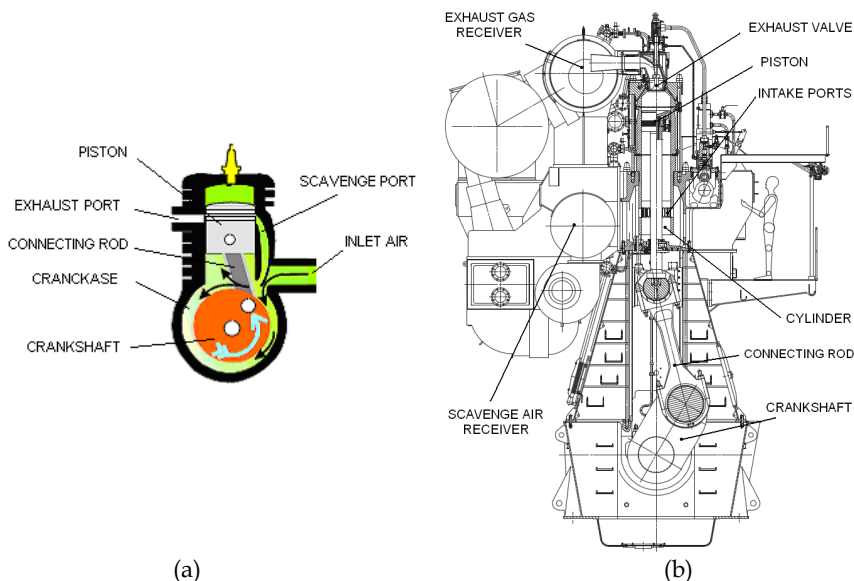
(a) Cross section of a spark ignition engine. (b) Cross section of a compression ignition engine, the MAN B&W 7S50MC.
